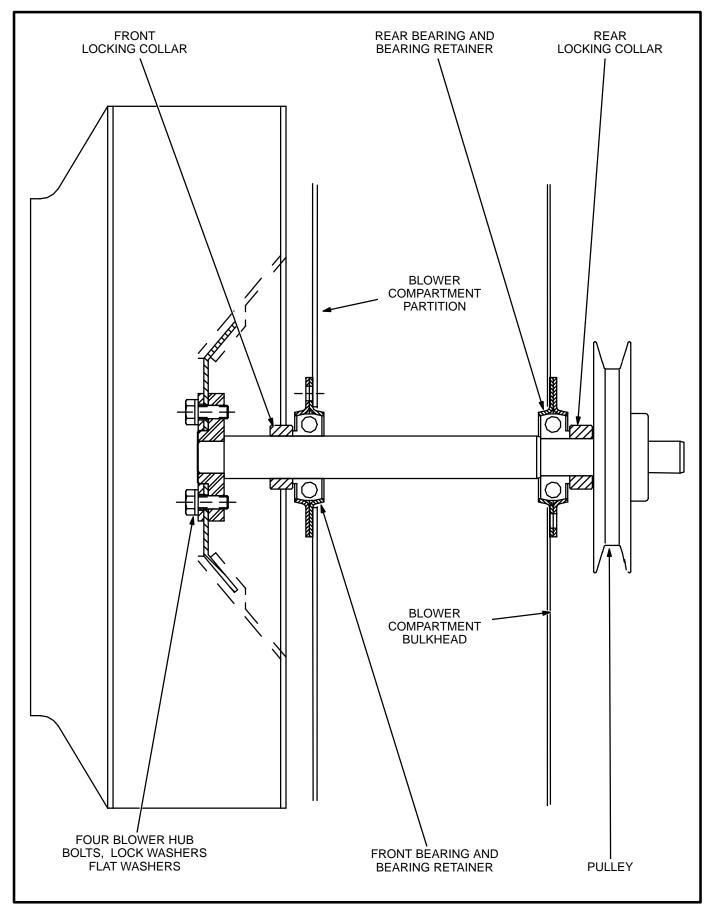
BLOWER, SHAFT AND BEARING ASSEMBLY
